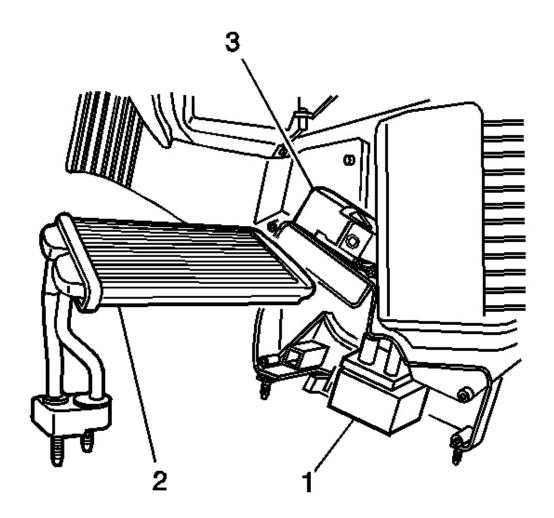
Removing/Installing Auxiliary Heater Core Courtesy of GENERAL MOTORS CORP.
